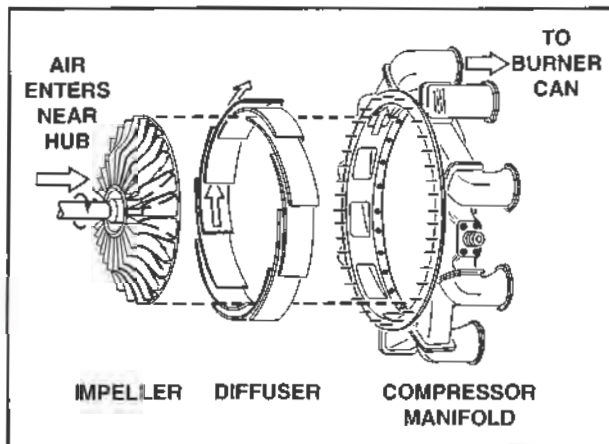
A single-stage centrifugal compressor consists of an impeller, a diffuser, and a compressor manifold.
